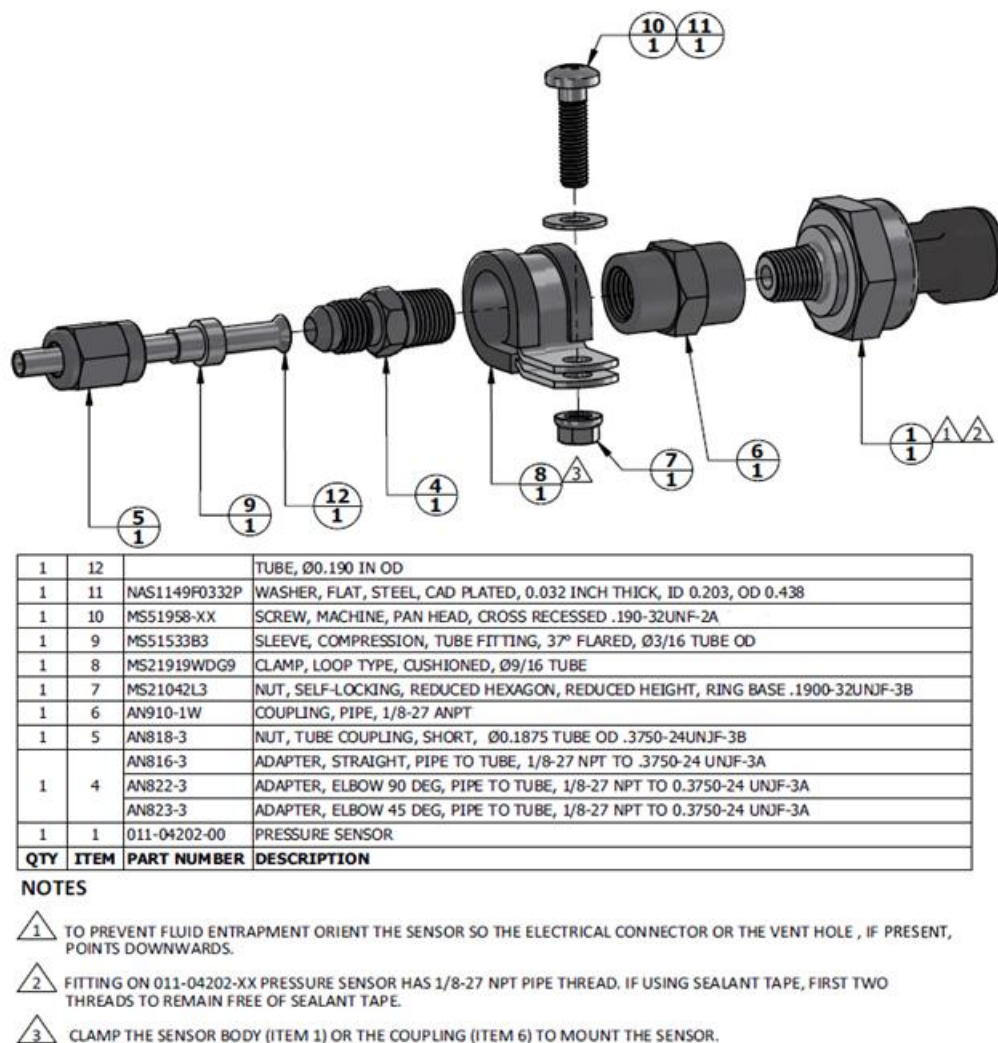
Pressure Sensor, Coupling Mount Type
